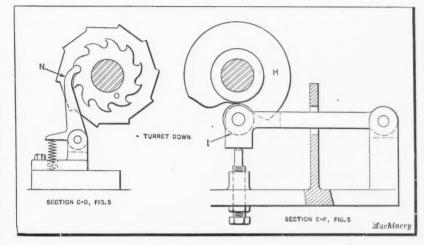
Sectional Views of the Mechanism shown in Fig. 5
